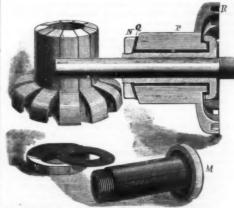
LONGITUDINAL SECTION OF ARMATURE.
